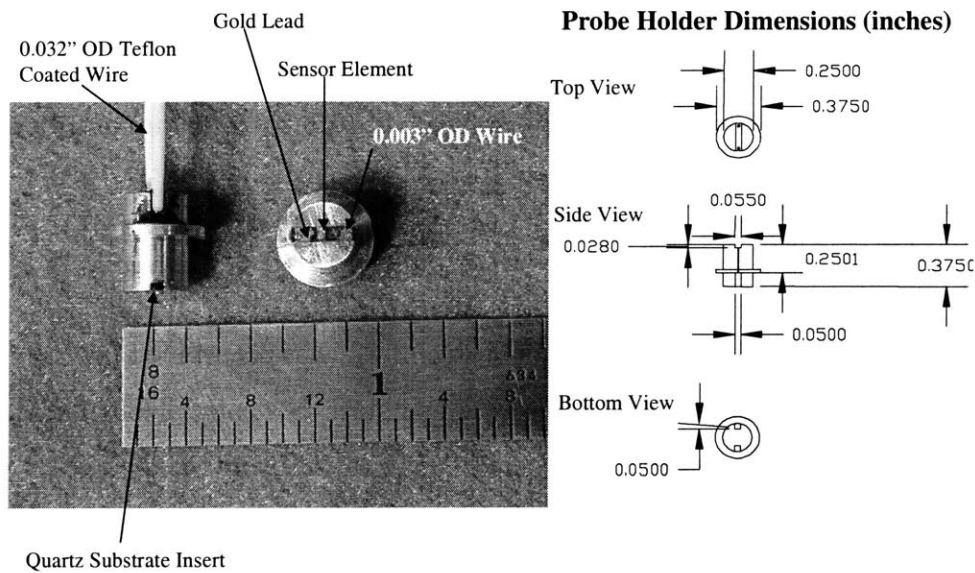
Completed Robust Hot Film Sensor with Aluminum Probe Holder.
